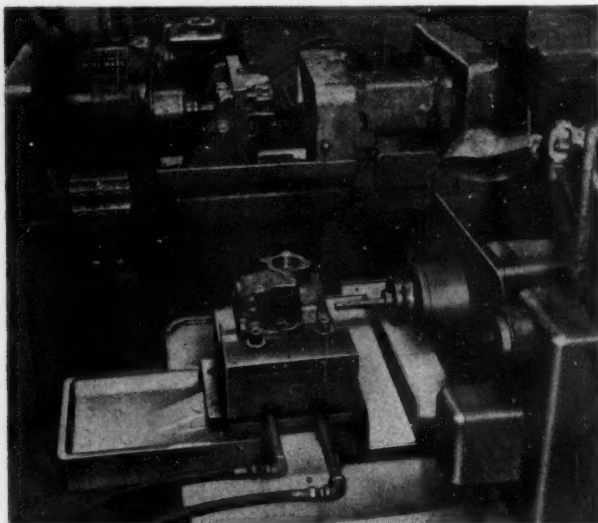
On the First of Four Heald Fine-boring Machines, seen in the Background, the Main-shaft Bores are Finished. The Second Machine, in the Foreground, has a Single Spindle and Operates on the Governor Valve Bore
